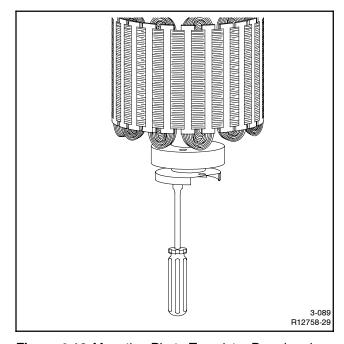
Mounting Photo Transistor Board and Magnetic Actuator (20-300 kW models shown)
